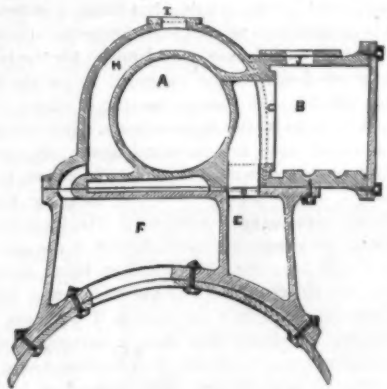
Cross Section of Cylinder, Dome, and Exhaust Chamber.
